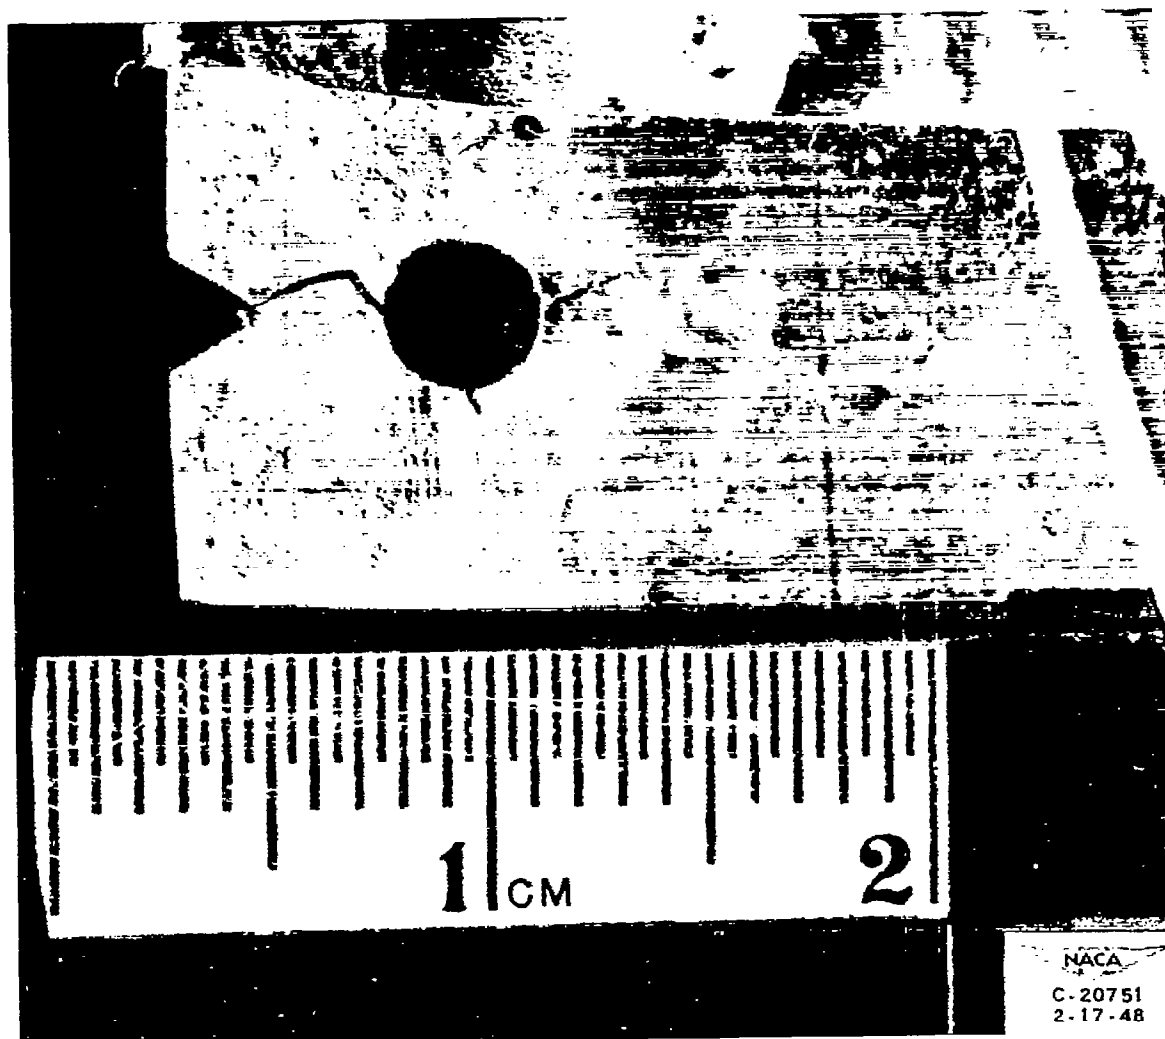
Crack in 13.5-inch-diameter tool-steel disk. Hardness, Rockwell C-11.
